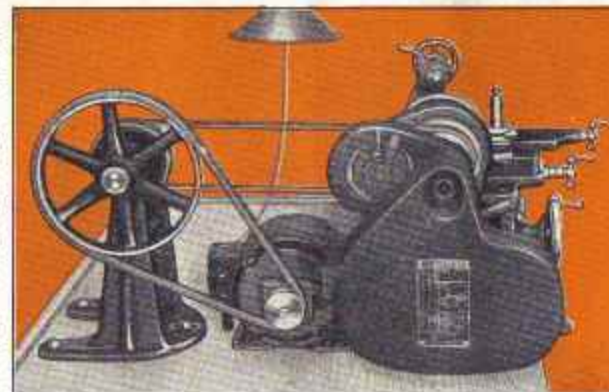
End View of 9-inch "Workshop" Precision Lathe with Horizontal Motor Drive Countershaft—Plain Type
